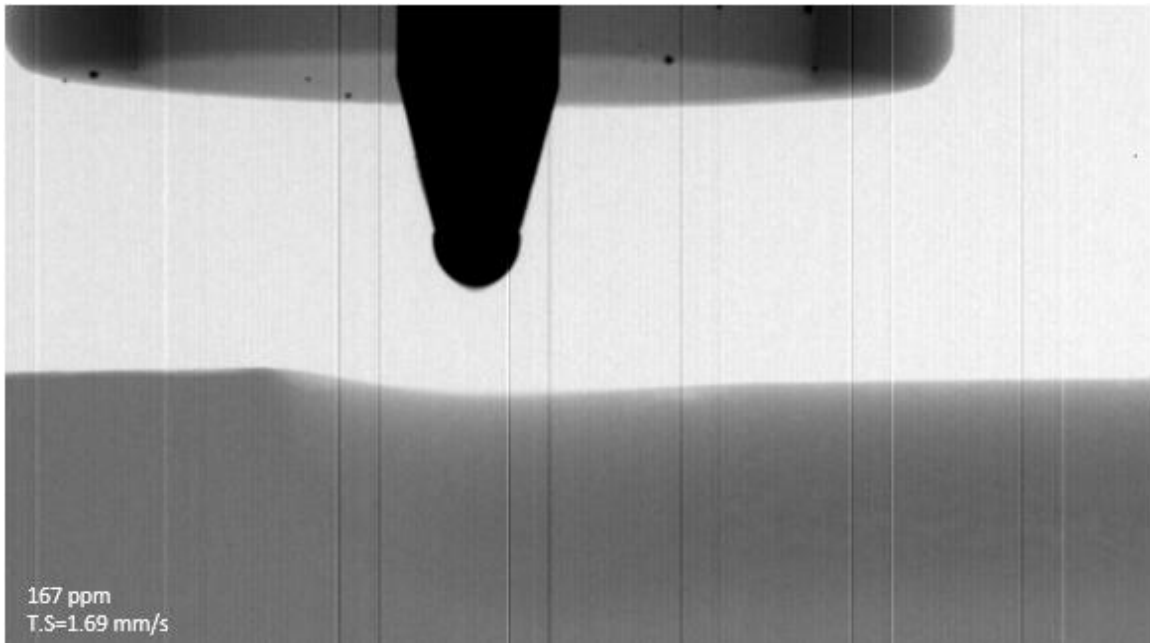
Alloy 6061 welded using 167 ppm of shielding gas hydrogen at 1.69 mm/s.
